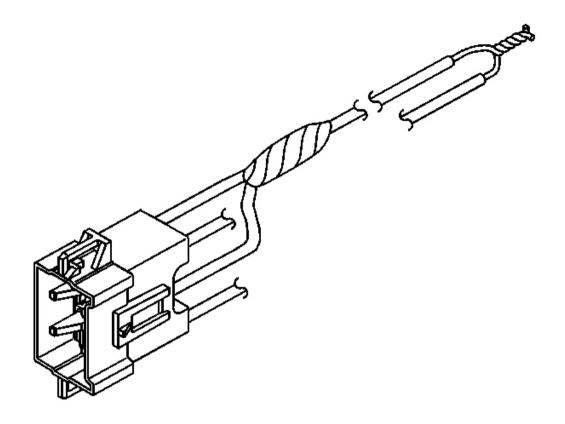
Insulating Connection With Electrical Tape Courtesy of GENERAL MOTORS CORP.
